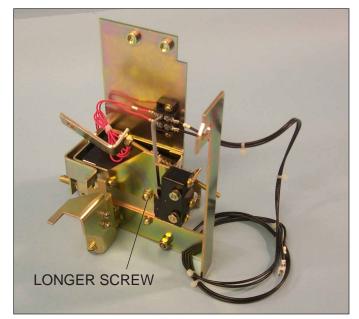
Auxiliary Switch Assembly Installed on the DTA Assembly.
